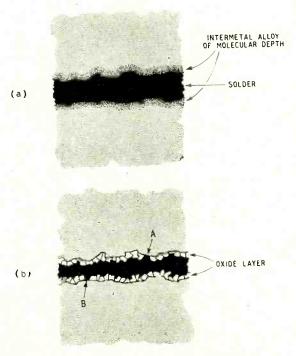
(a) Magnified section of a well-soldered joint. (b) Magnified section of a high-resistance dry joint.
